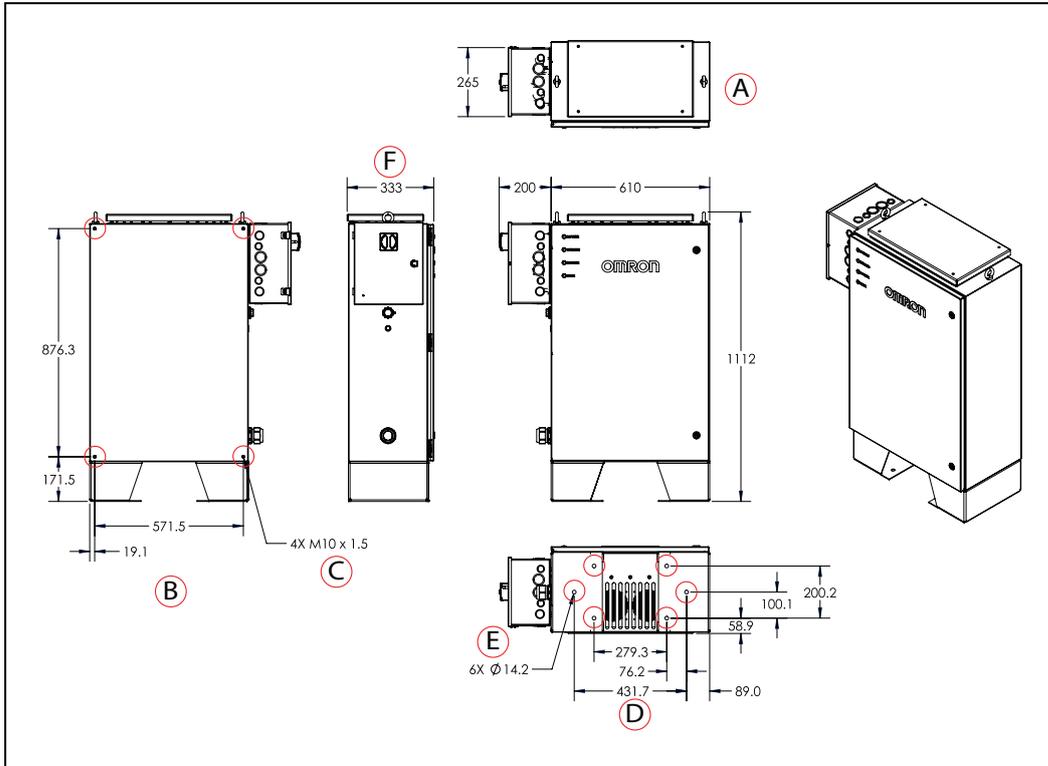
Power Supply Box Dimensions, (A) Top View, (B) Back View, (C) Wall Mount Holes, (D) Bottom View, (E) Floor Mount Holes, and (F) Side View (units are in mm)
